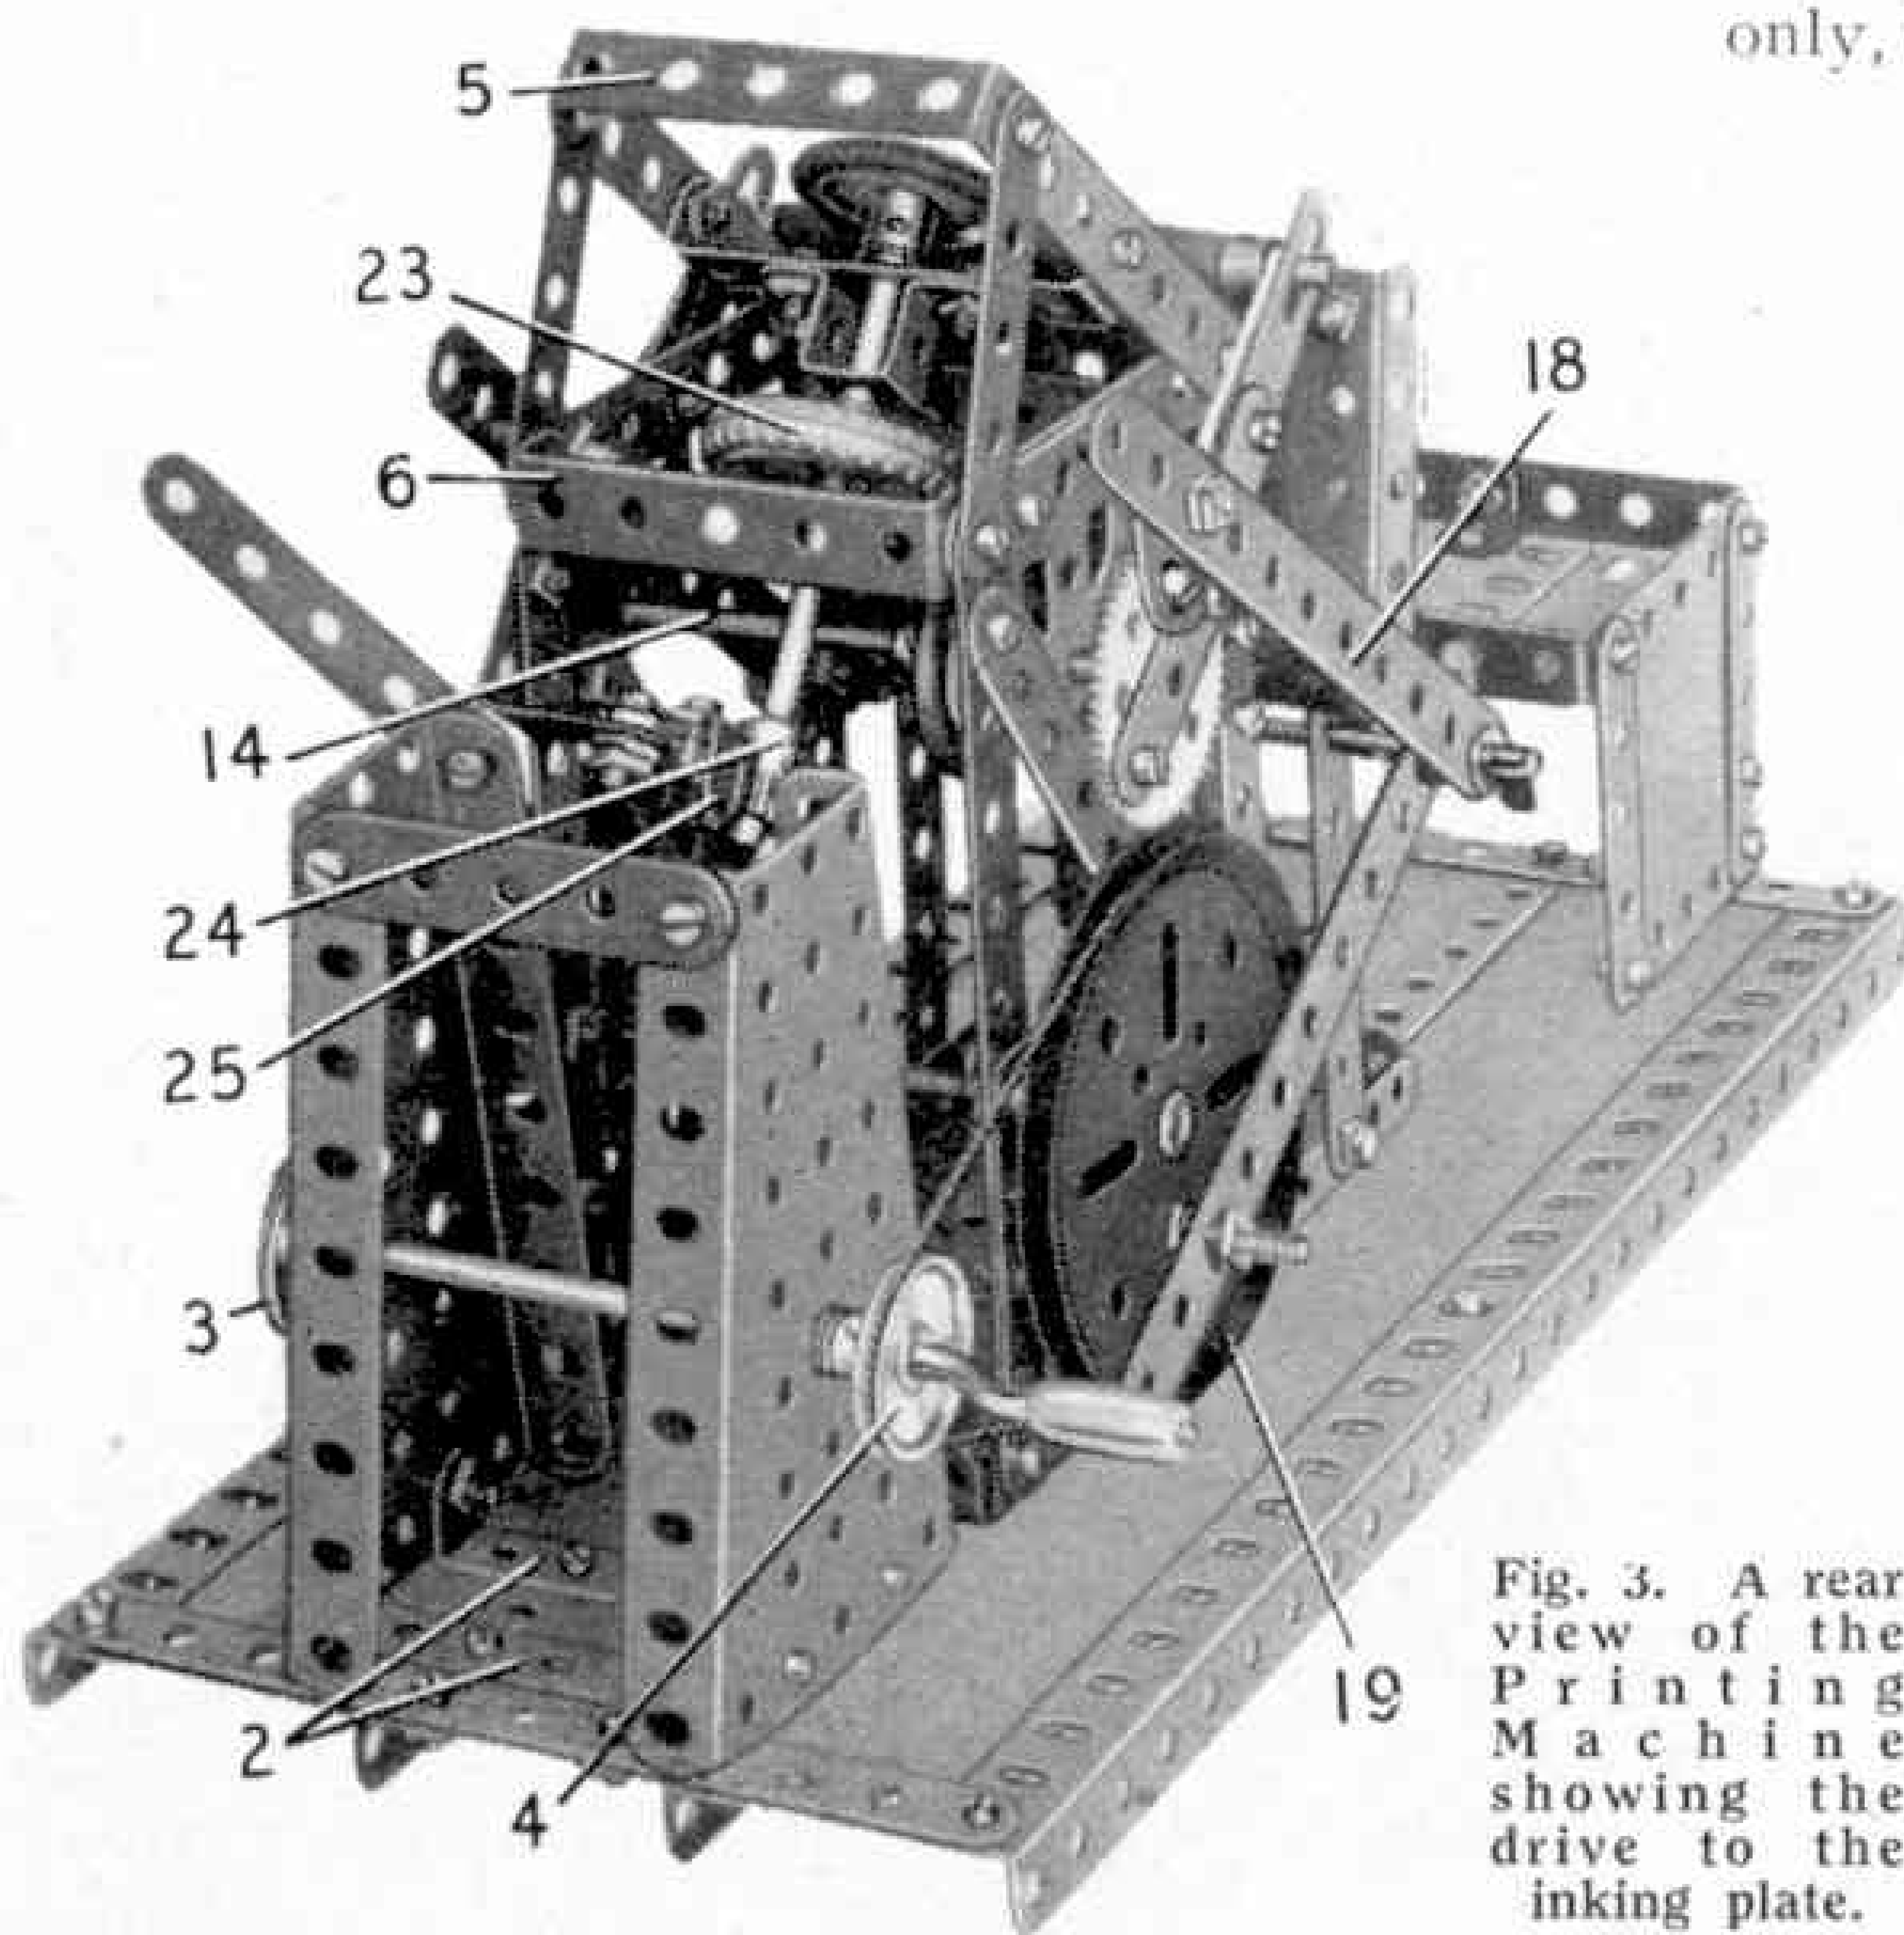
A rear view of the Printing Machine showing the drive to the inking plate.
